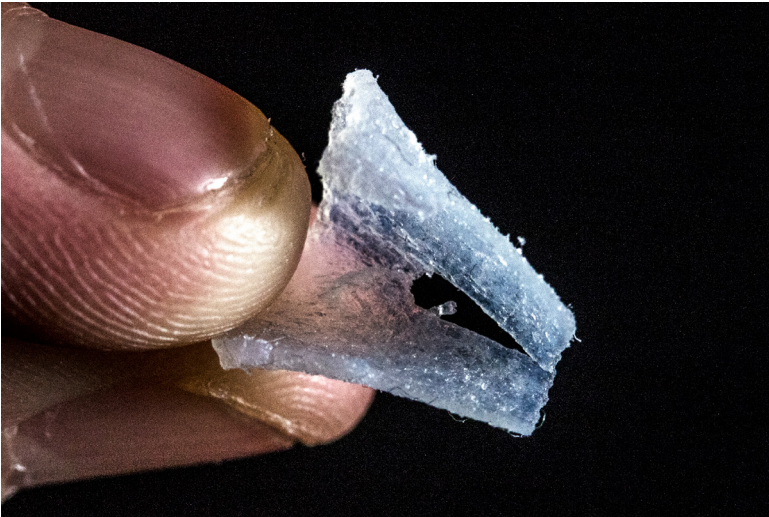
Valve leaflet that fell out of the tube during the removal of support material.
